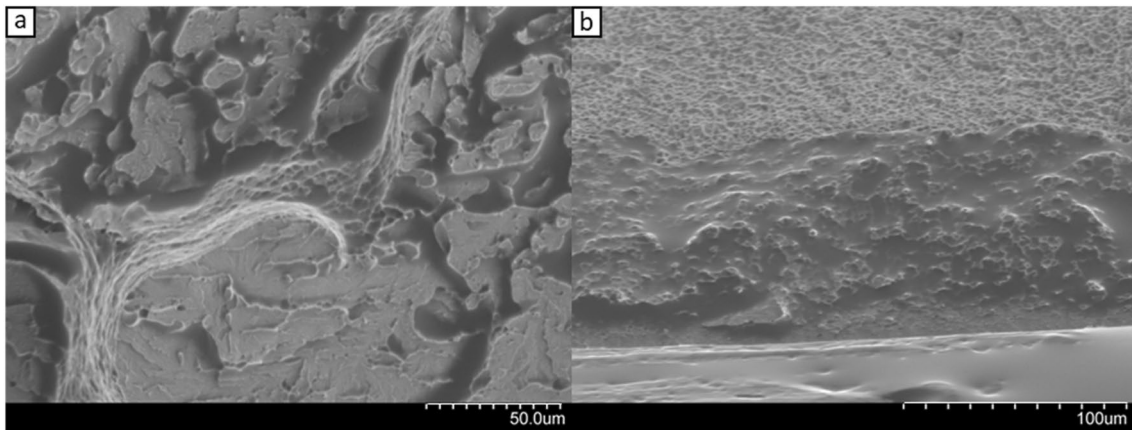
SEM imaging of the fracture surfaces of Charpy impact samples produced by HH (a) and LH parameters (b)
